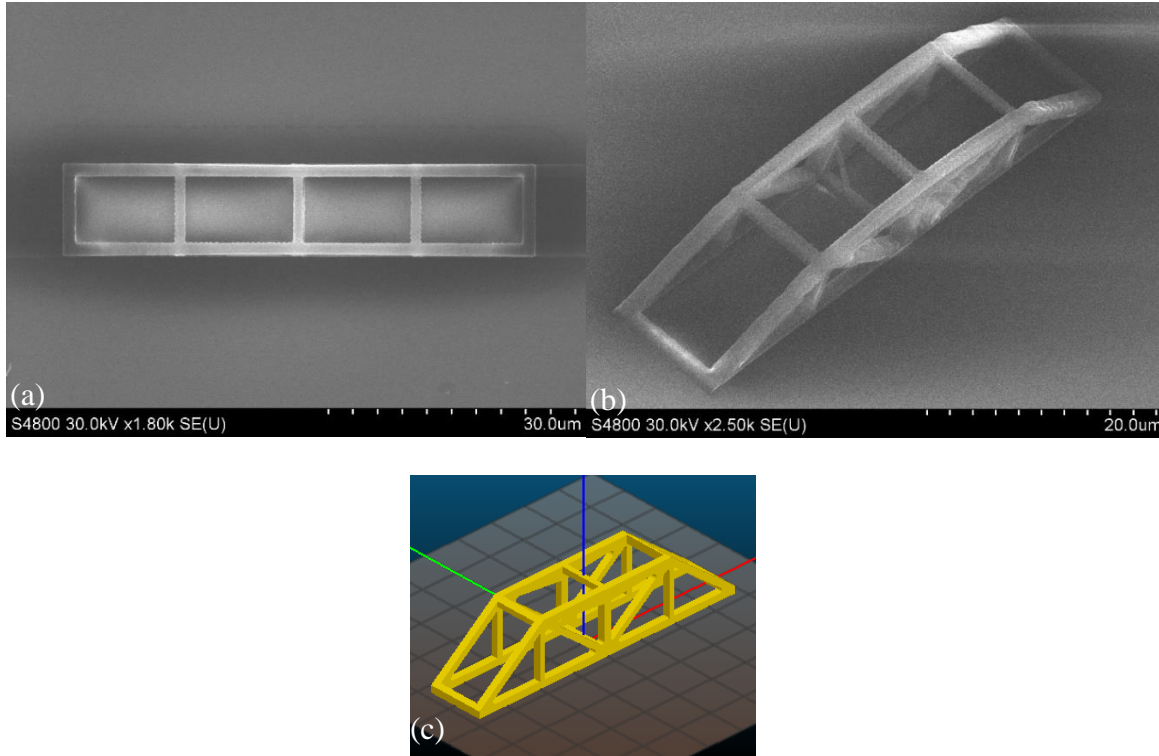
(a)Top view and (b) tilted view of printed structure with (c) CAD model.
